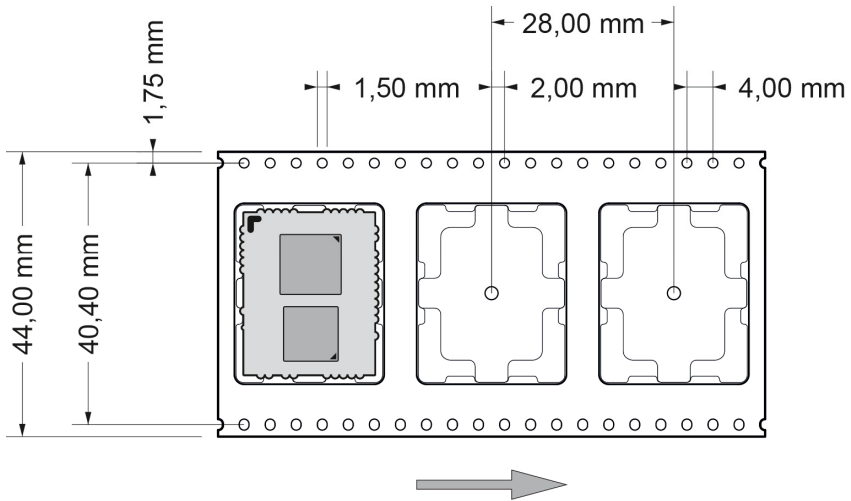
Dimensional drawing of the strip with rolling direction (see arrow);
